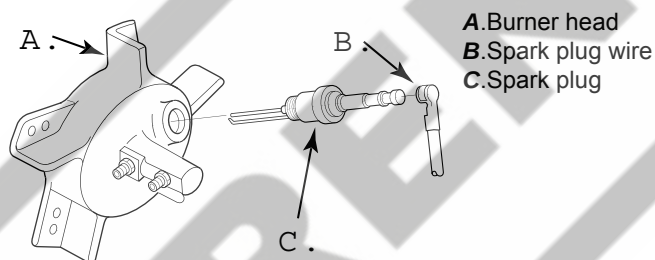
Spark plug removal, 70.000, 100.000, 150.000 Btu/Hr models.
